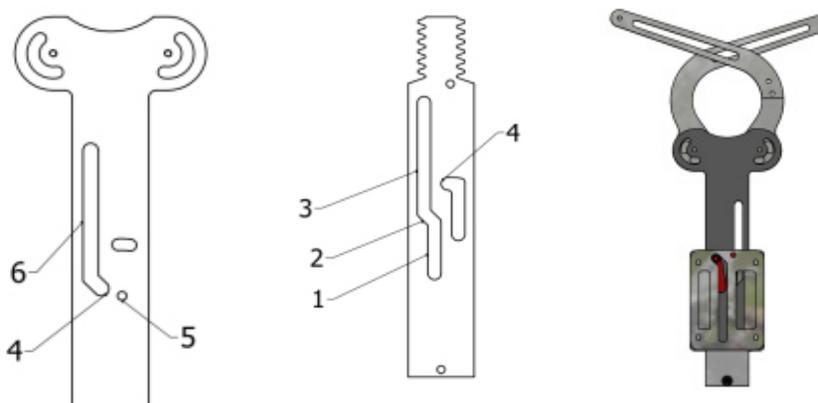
Sliding groove of the locking pin on the clamping bar, rack, and pin release plate.
